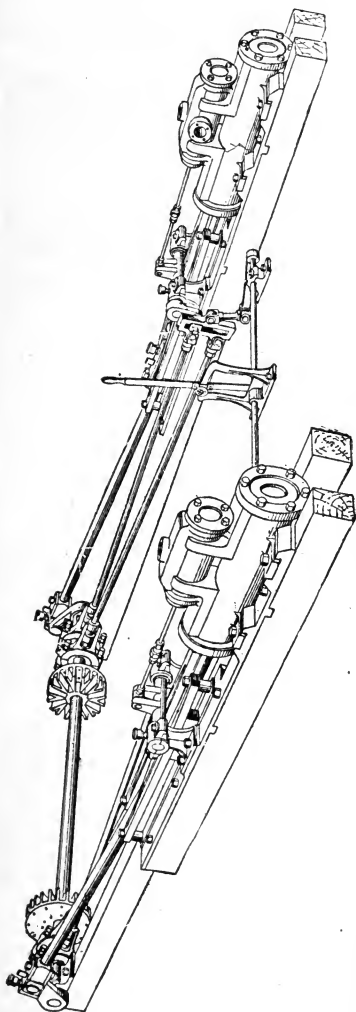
,013.—Direct connected stern wheel engine, showing general arrangement of the cylinders and driving gear, connected to the shaft of the stern paddle wheel.
